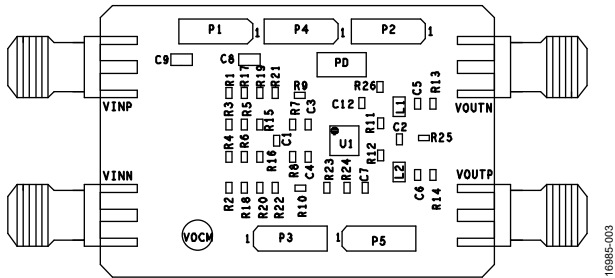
ADA4945-1CP-EBZ Evaluation Board Assembly Drawing, Primary Side
